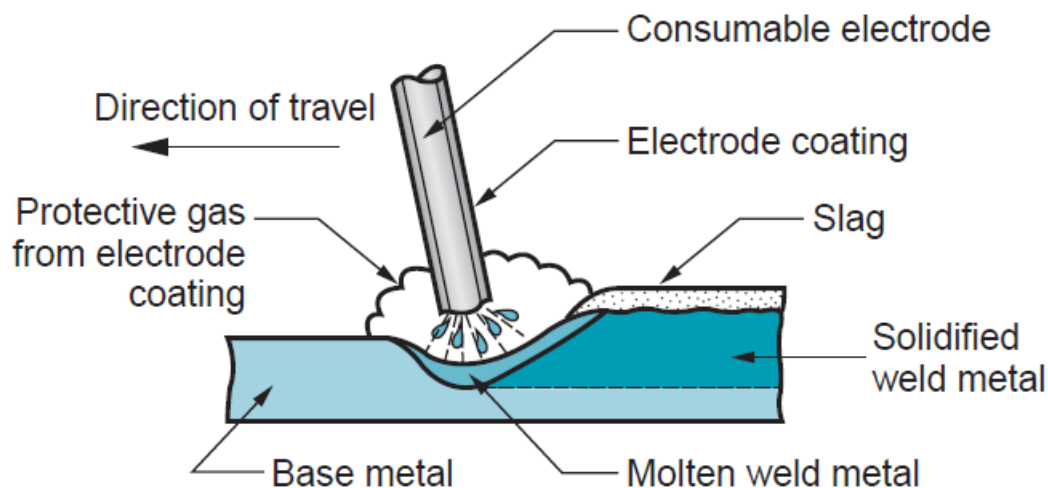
Shielded metal arc welding (SMAW).
